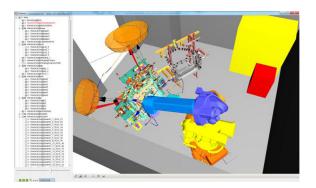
A completely specified RLW workcell, including a dimpling and a welding fixture.
